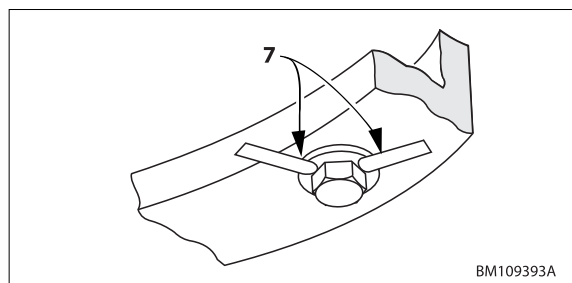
Frame Side Bearing Bolt Feeler Gauge Check
